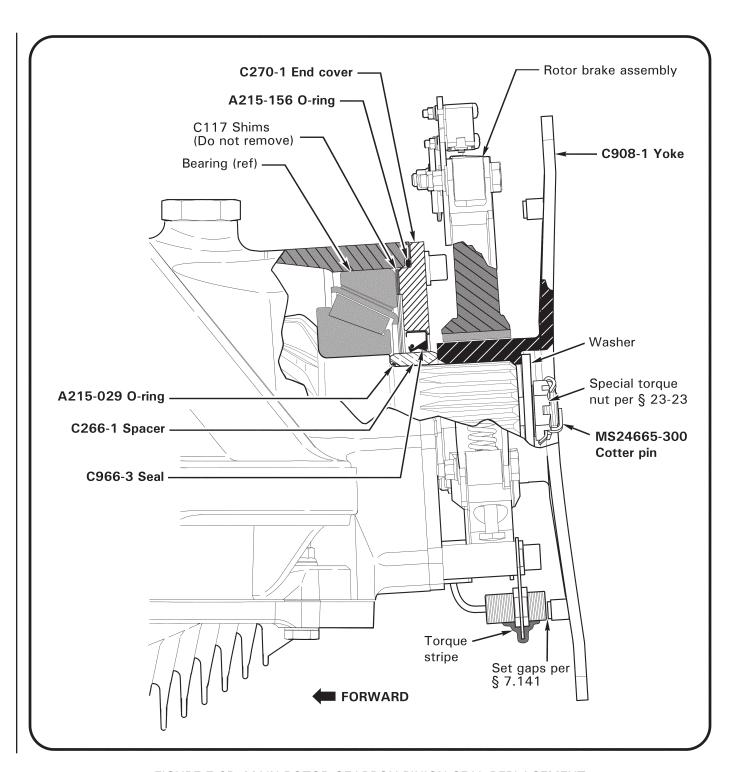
B MAIN ROTOR GEARBOX PINION SEAL REPLACEMENT
